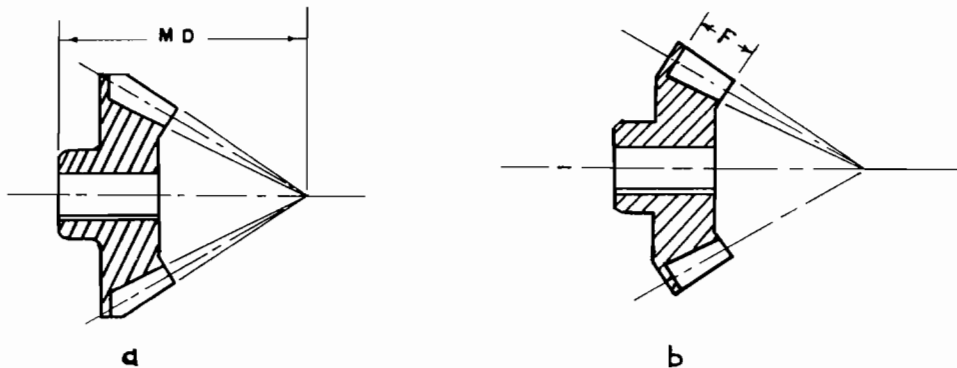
Bevel gears (a) Machine cut (b) Forged or machine cut with back shoulder.
